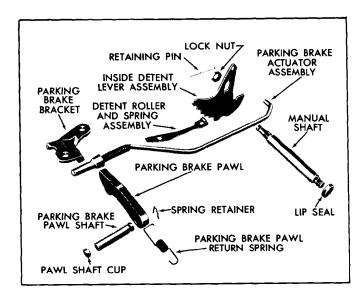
E-157 Exploded View of Manual and Parking Linkage
